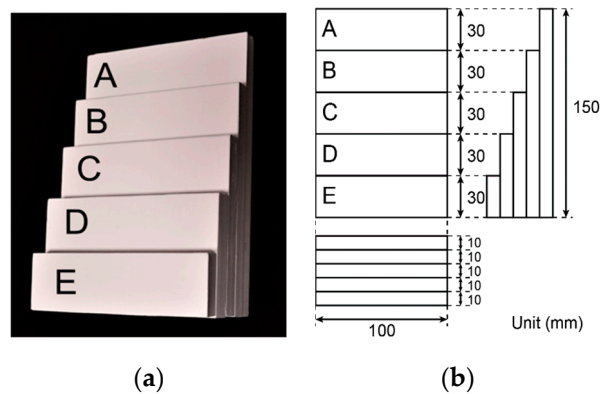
Figures of the step sample of the measurement object: (a) Photograph of the step sample and (b) drawing of the step sample.
